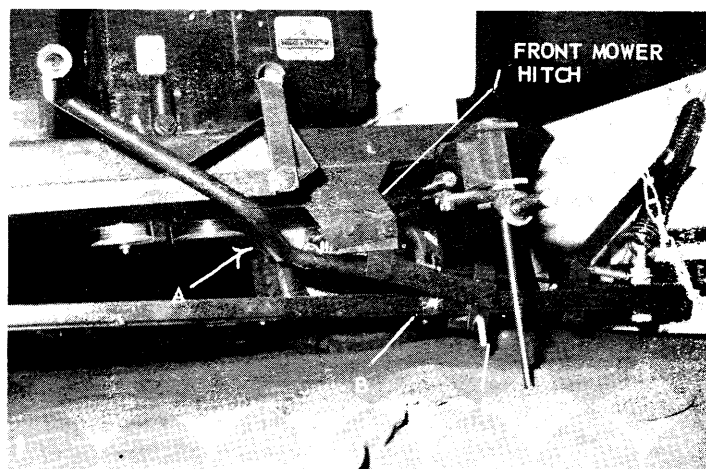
Making sure  $\frac{1}{4}$ " Hex Lock Nut (A) is tightened as far as possible on Angling Bar Assembly (B), raise front of Blade & Interlock Latch Assembly (D) and Latch Bracket (E). The blade should stay up on its own.
